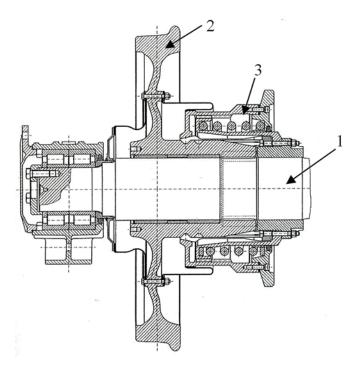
Cross section of a wheel set with automatic change of wheel track SUW2000 [13];1 – wheel set axle, 2 – wheels rolling on the set axle, 3 – lockup mechanism
